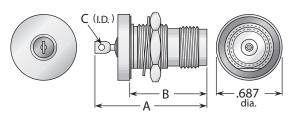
(Rear mount, hermetically sealed, with mounting gasket)
